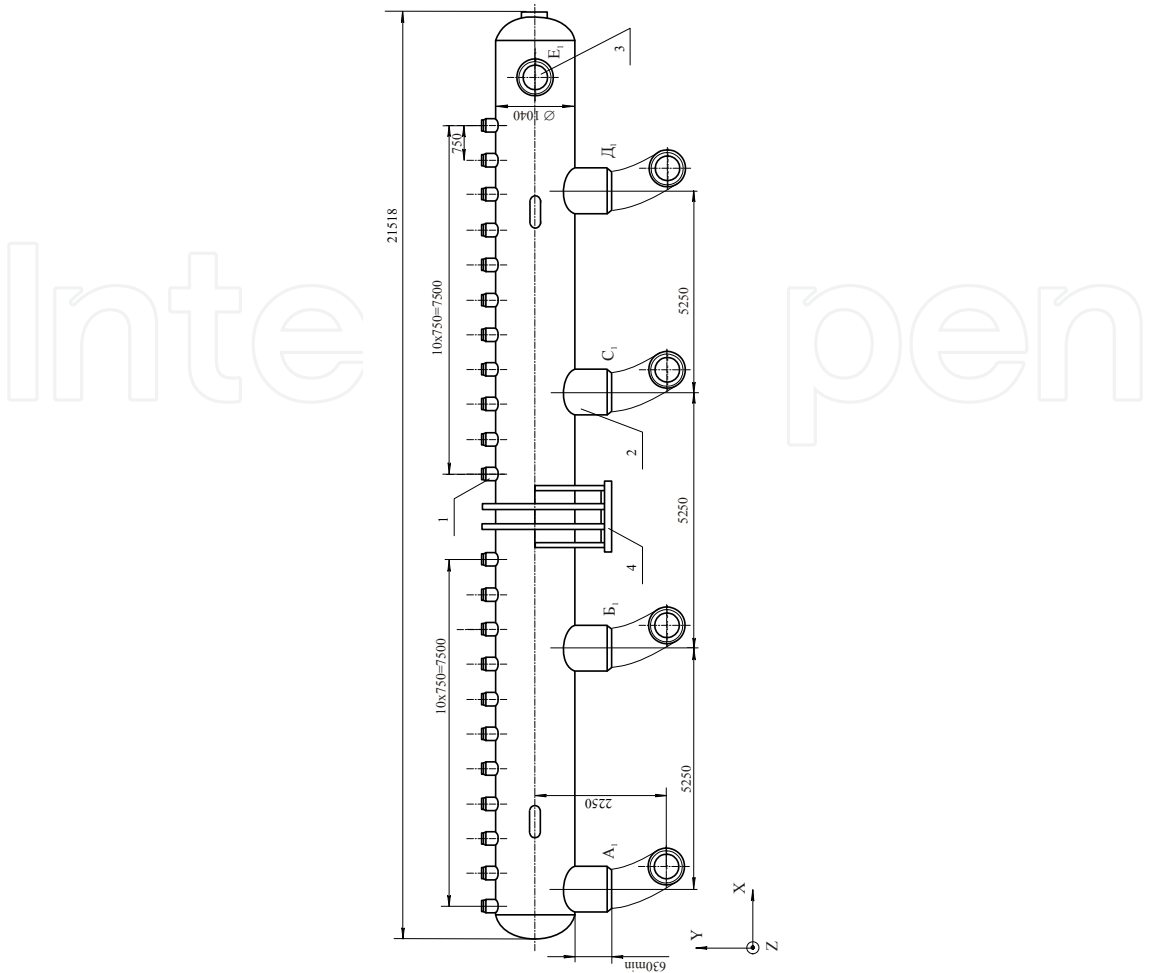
Sketch of header pumping: 1 - nozzle DN300 to joint RGK; 2 – nozzle DN750 and elbow to joint with pipe-line pumping; 3 – nozzle DN750 to joint with unit between headers in-take and pumping; 4 – central stopper
